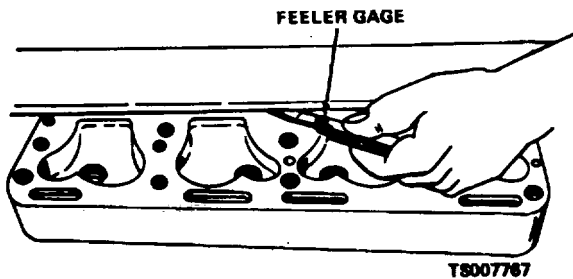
Checking Cylinder Head Flatness Lengthwise.
